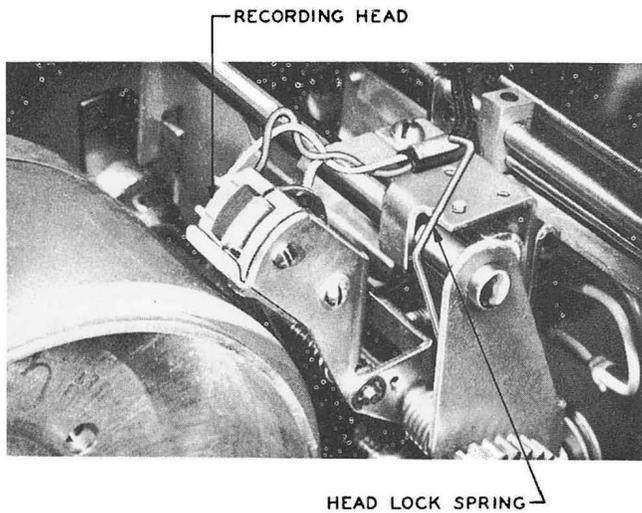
2AB Telephone Answering Set, Recording Head Shown in Operating Position with Recording Head Lock Spring in Notch in Carriage Bracket
